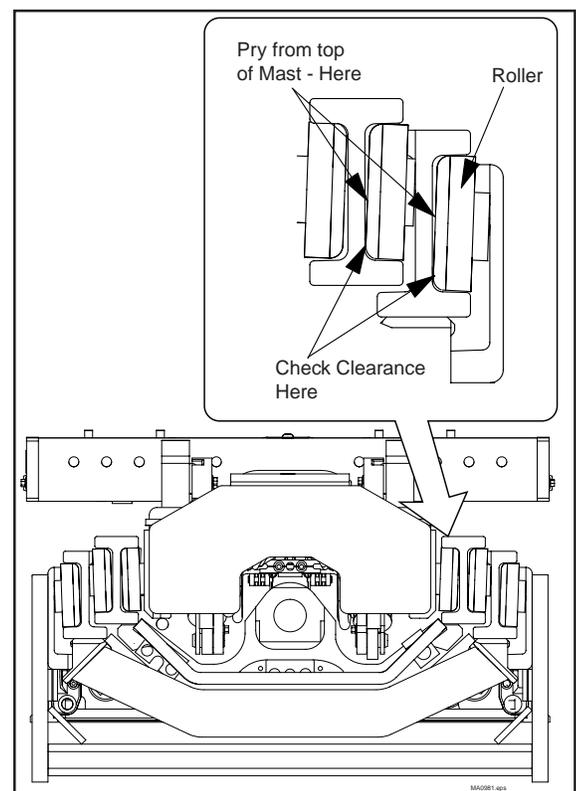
A. Measuring Load Roller and Thrust Plug Clearances.
